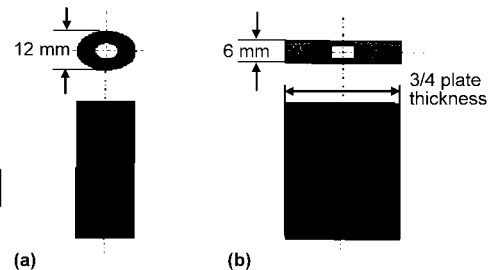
Example of consumable guide designs for a steel plate. (a) Standard type for standard electroslag welding. (b) Sandwich type for narrow-gap improved electroslag welding. Source: Ref 34
